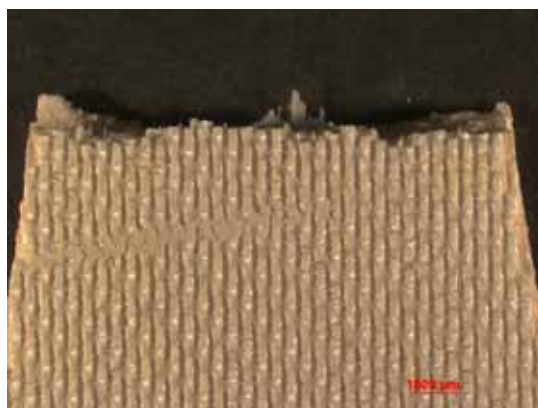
Fracture surface of the N610/Al₂O₃ specimen with 8ply HSW subjected tension to failure in laboratory air at 1100 °C.
